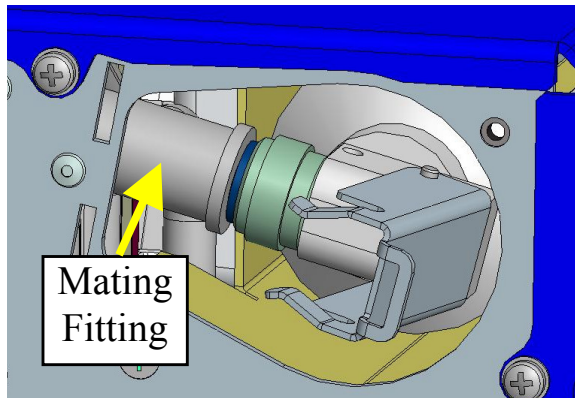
Tube Adapter and Right-Angle Fitting Assembly Locations
